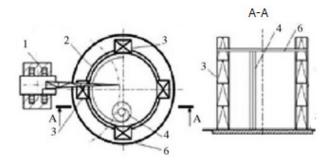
Diagram of a stand for shell manufacturing: 1 — crane; 2 — guide ring in the upper level of the shell; 3 — assembly towers; 4 — coiled steel being uncoiled; 5 — guide ring
